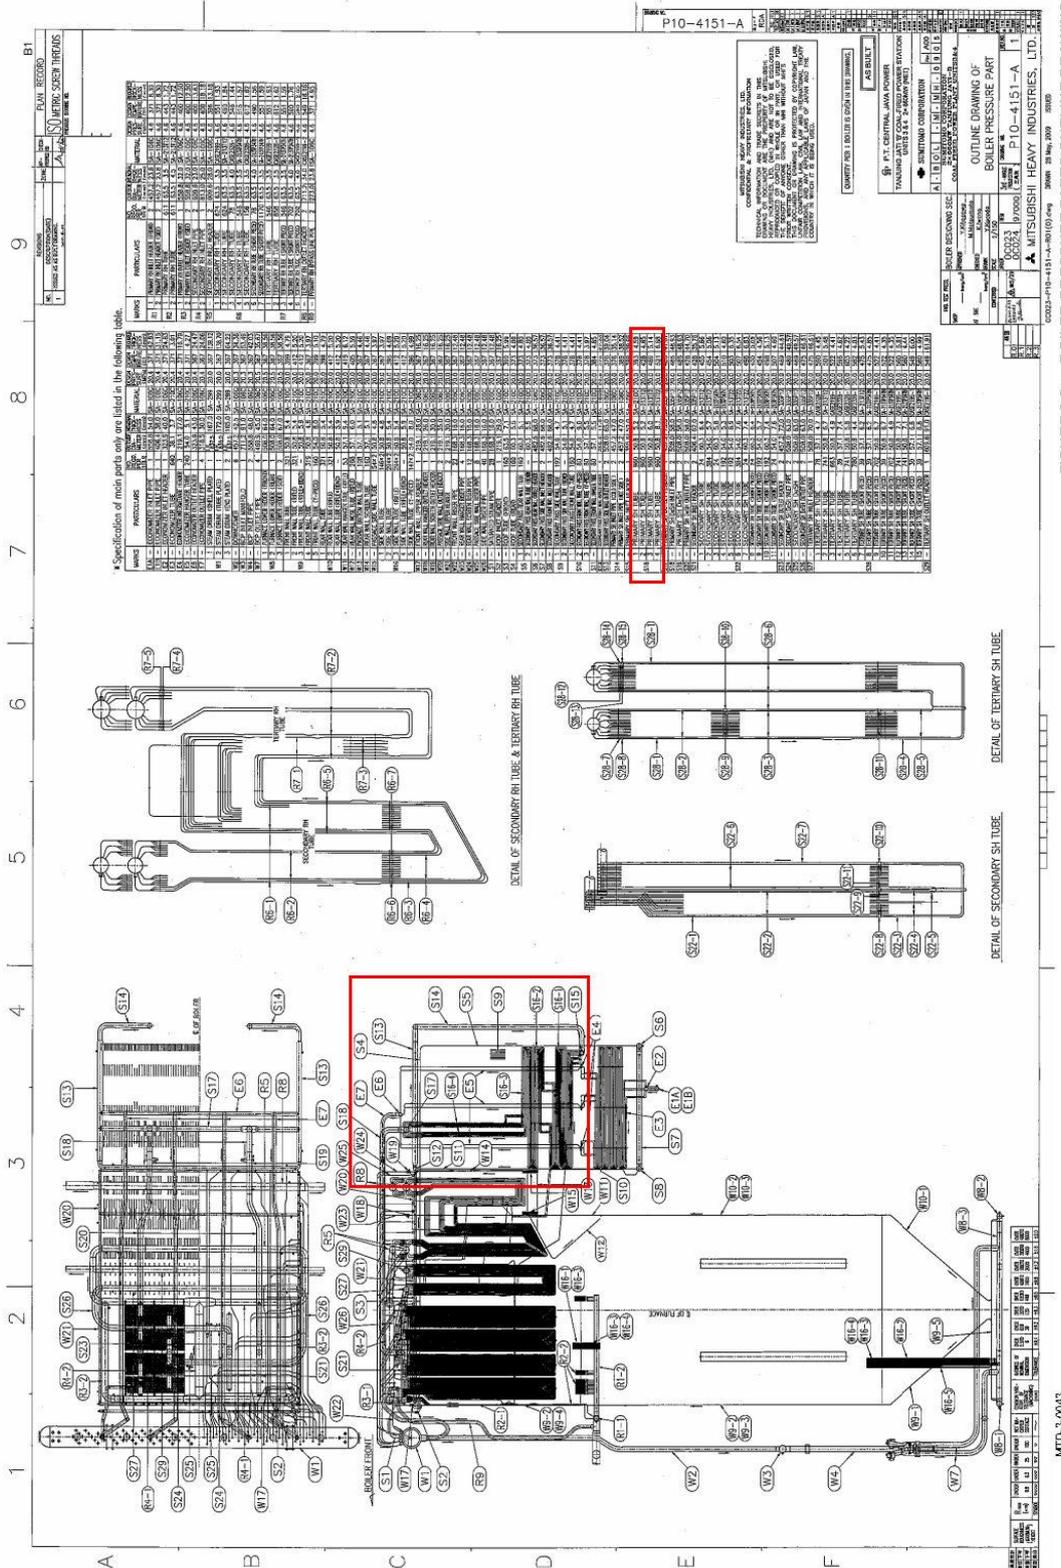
BOILER PRESSURE PARTS OUTLINE DRAWING
